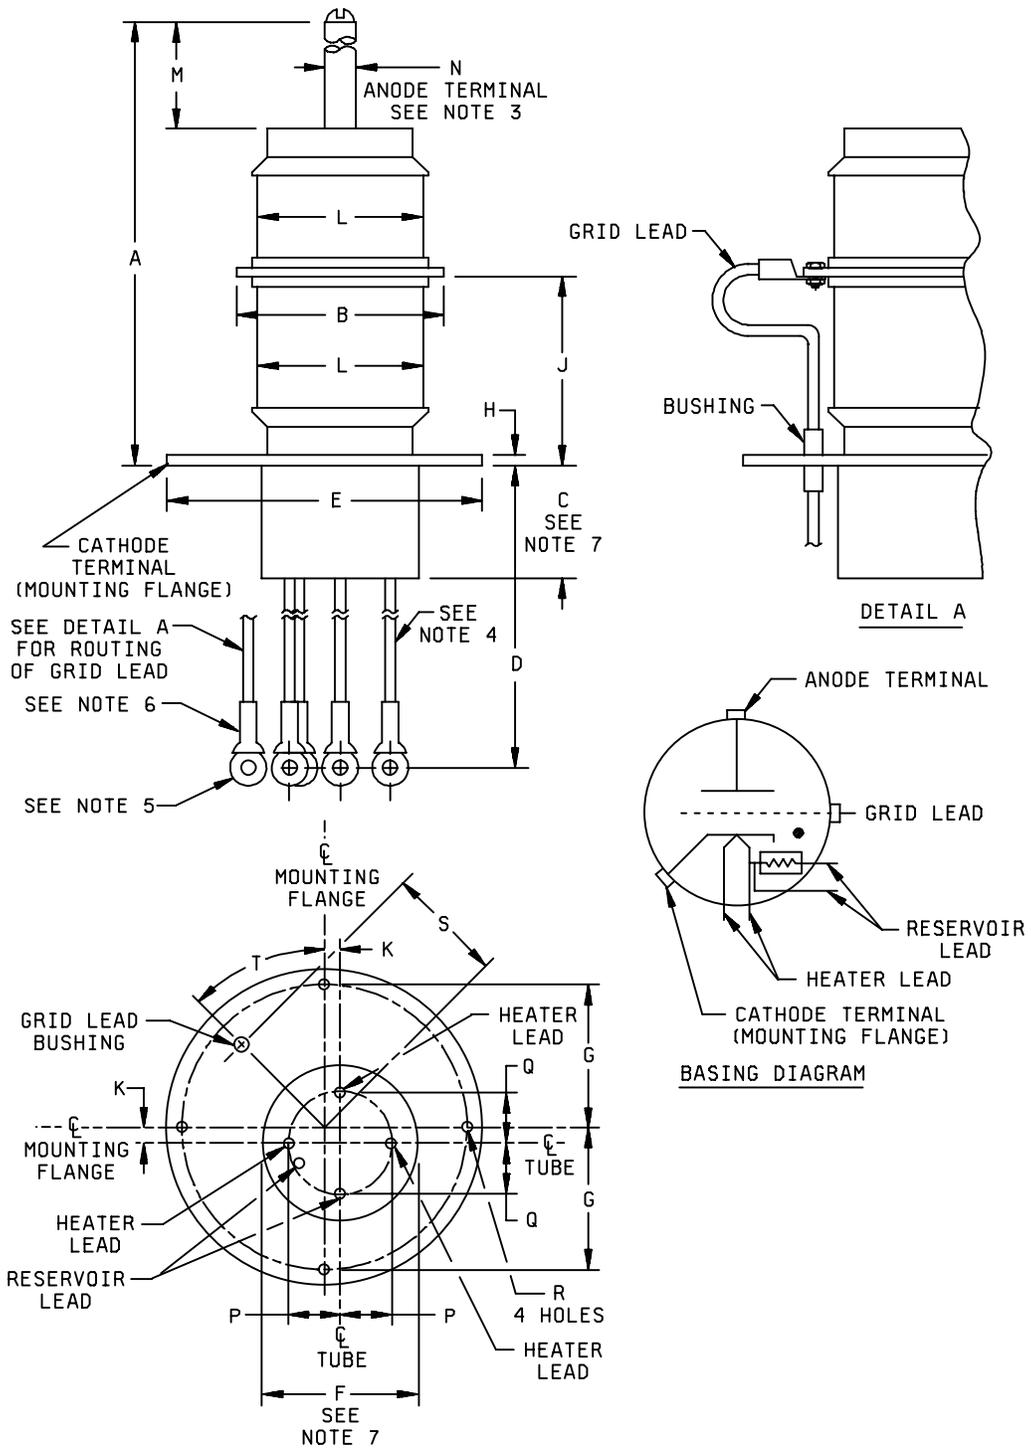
A. Alternate outline drawing of electron tube type 8789.
